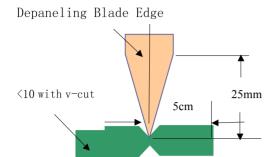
Demand of blade of automatic board cutter to device in the banned layout area of PCB edge When v-cut design is applied, these conditions must be met in order to protect components during the splitting process, and ensure that the boards will split freely.
